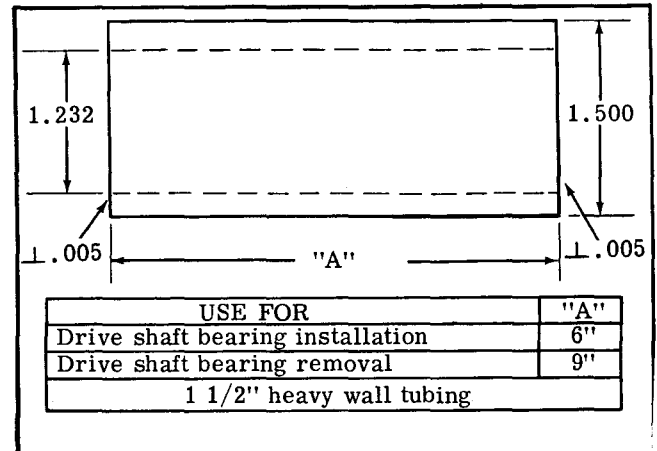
Special Shaft Bearing Removal and Installation Tools.
